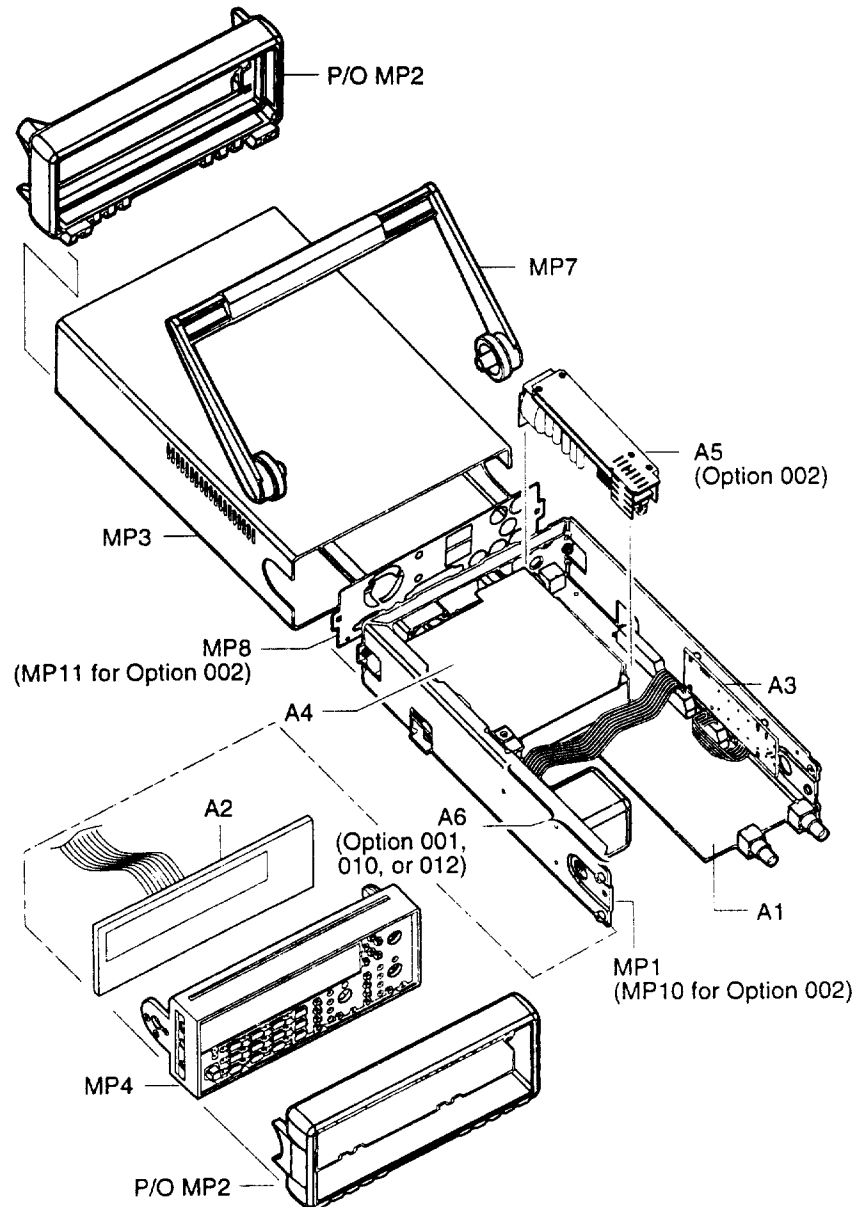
HP 53131A/132A/181A Exploded View (Chassis Parts and Assemblies)
